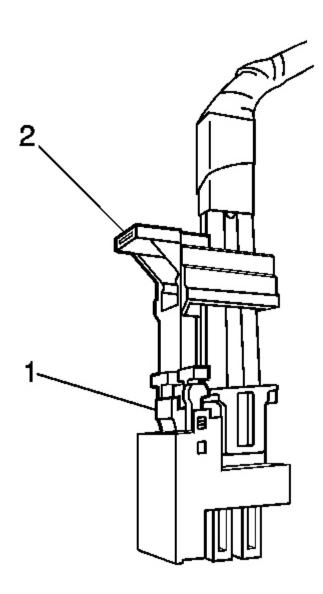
View Of CPA Retainer & Tab Courtesy of GENERAL MOTORS CORP.
